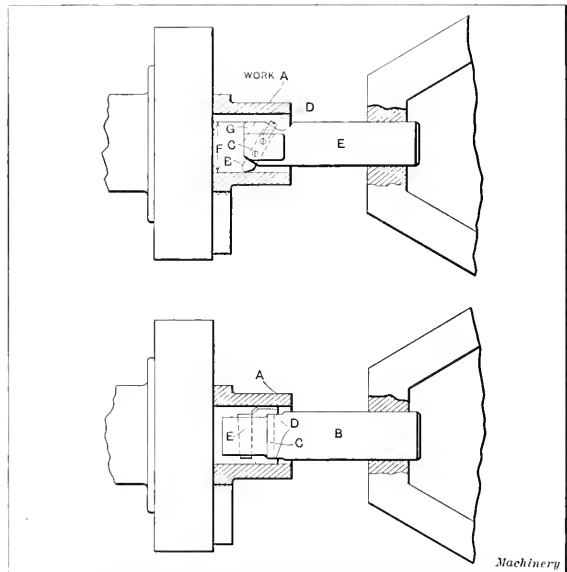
(Upper View) Boring-bar with Adjustable Cutter; (Lower View) Boring-bar with Double-ended Cutter
